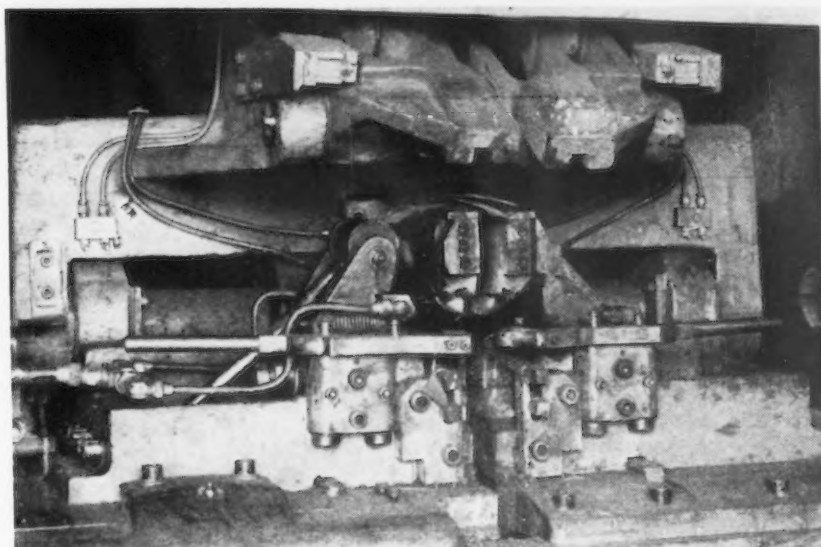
Alligator type of clamp is used for clamping light cylinders. Hand toggle clamps at front are used for aligning the edges.
